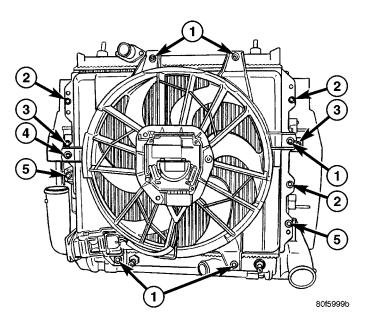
Cooling Module Fasteners - 2.4L Turbo
